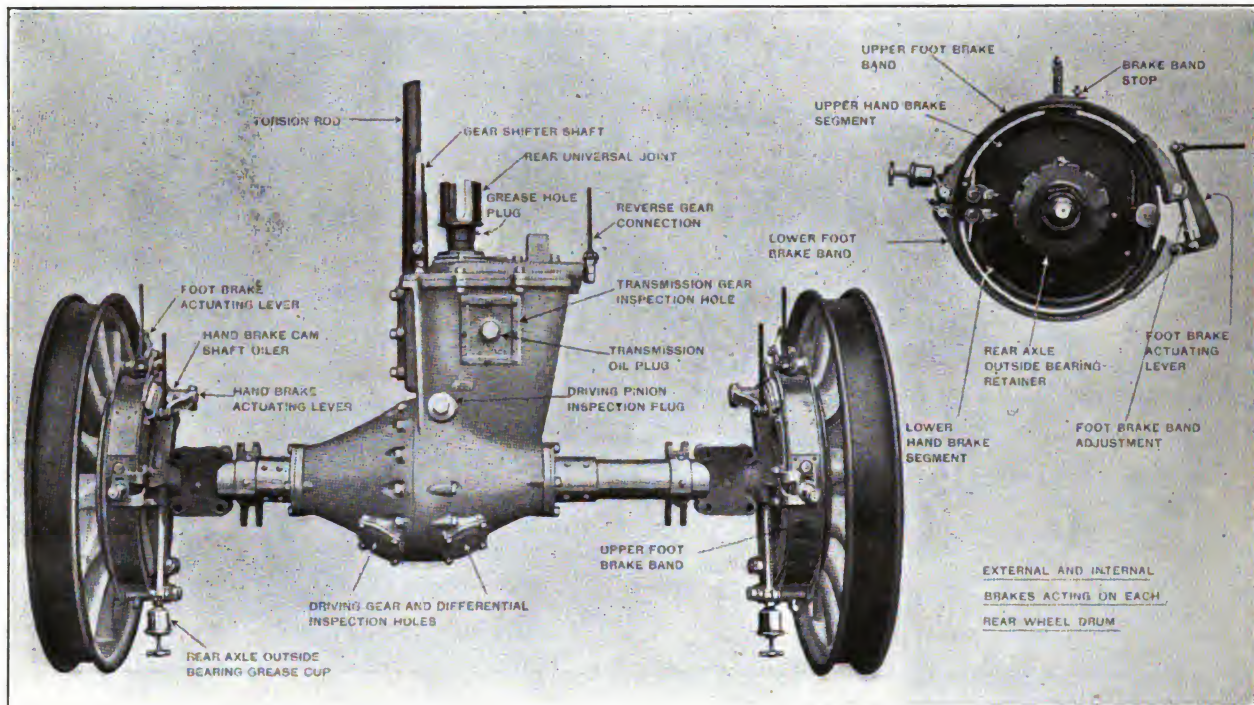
THE TRANSMISSION, DIFFERENTIAL AND REAR AXLE UNIT AND DETAIL OF BRAKE
